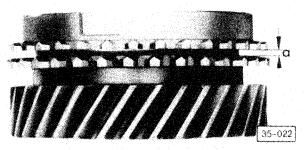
Synchronizer ring 1st/2nd gear, checking
